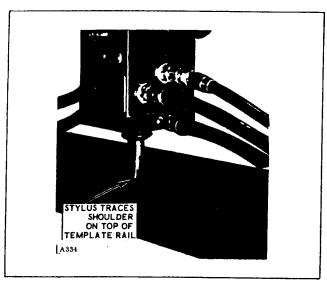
Tracing Shoulder on Top of Template Rail to Check Alignment
